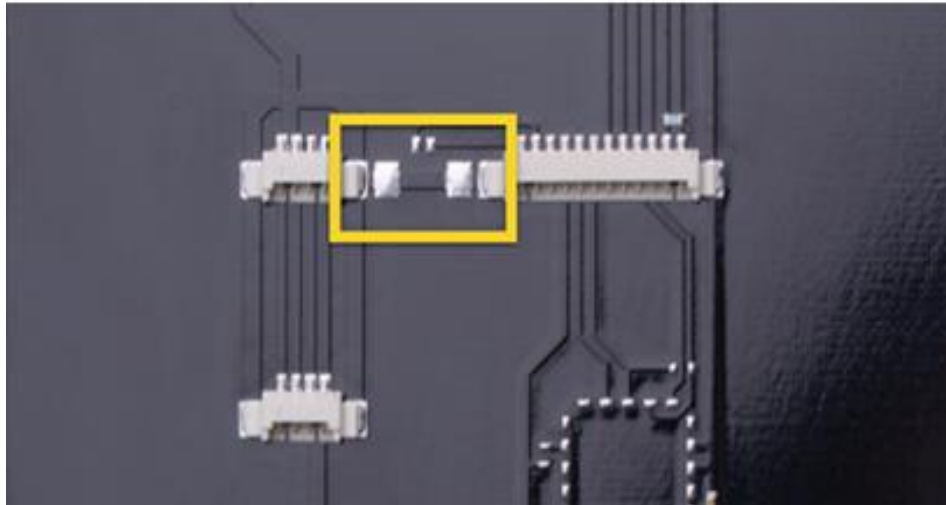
3U Solar Panel X/Y (Bottom Side) - location of the pads for the external magnetorquer connector
